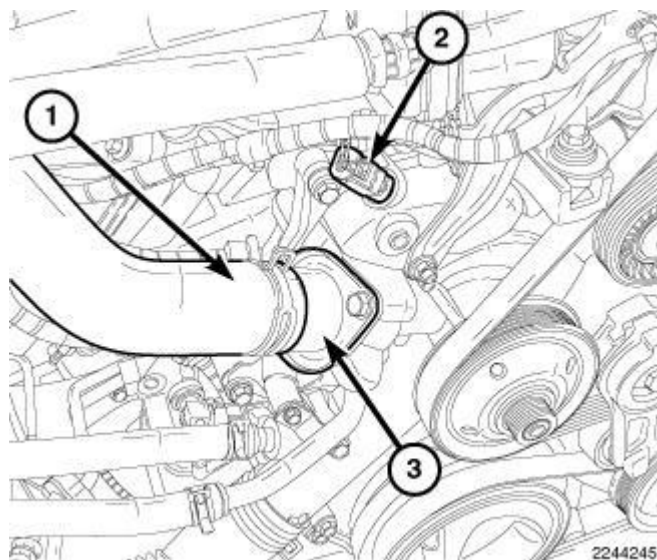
Engine Coolant Temperature (ECT) Sensor & Thermostat
